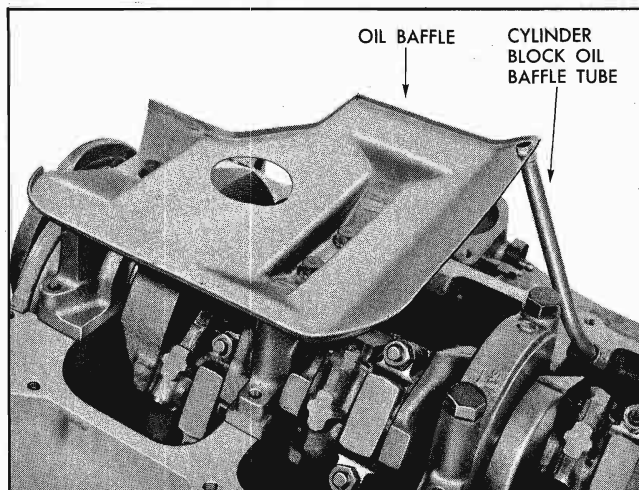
Proper Assembly of Oil Baffle and Tube
